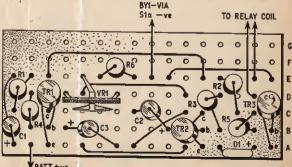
Components to the left of the dotted line shown in Fig. 1 are assembled on this Veroboard
